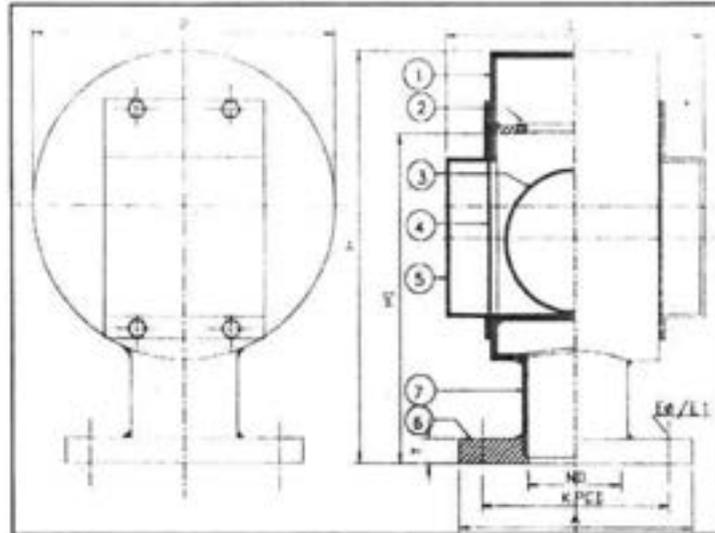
Cross Sectional View - Typical Air Vent Valve
